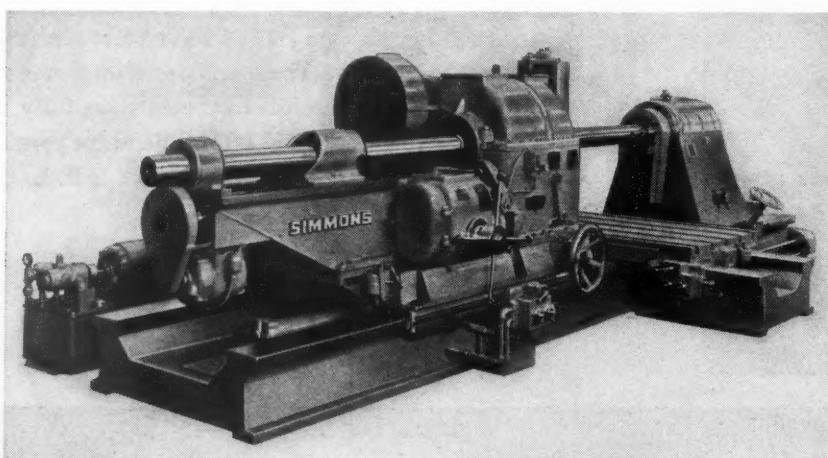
Simmons single-unit horizontal boring and facing machine with hydraulic-feed cross-table
